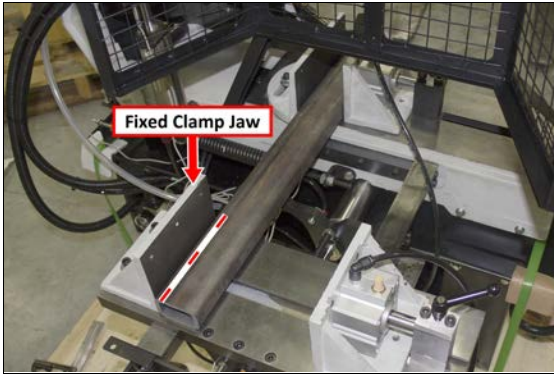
M8 socket head cap screws on the fixed clamp jaw.
